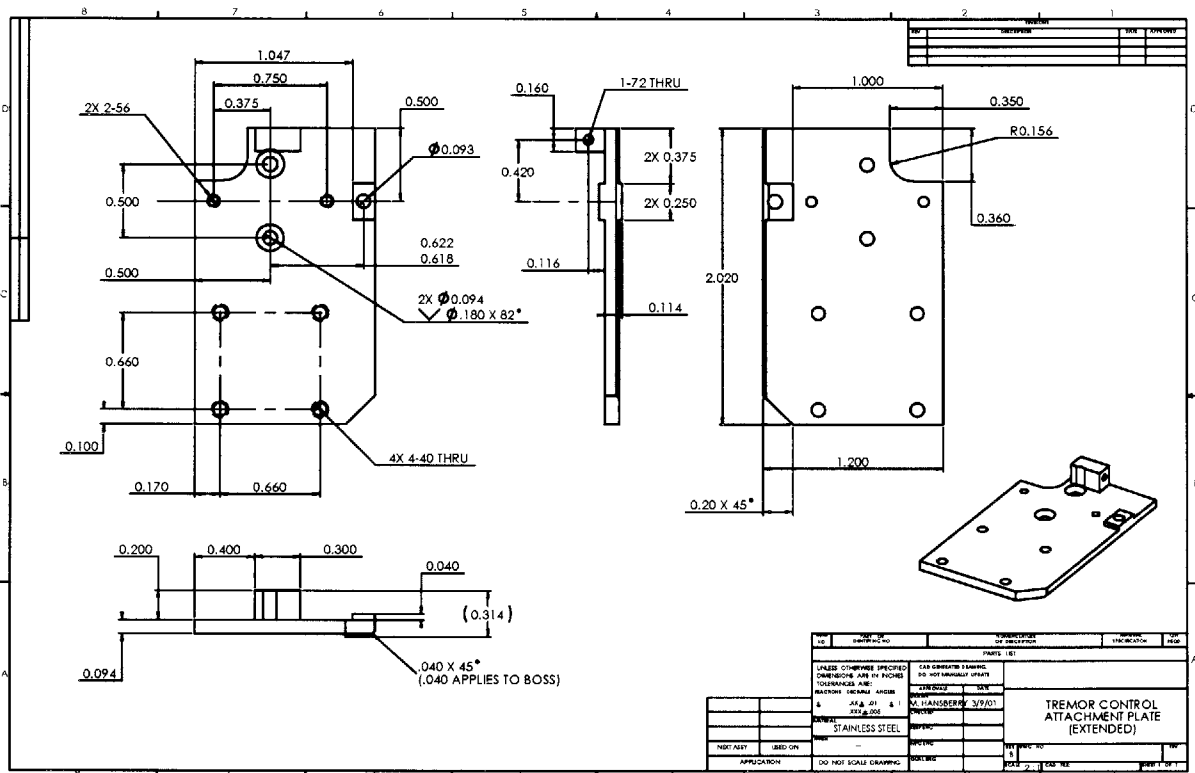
Mechanical drawing of the adapter plate between the actuator and ball slide.
